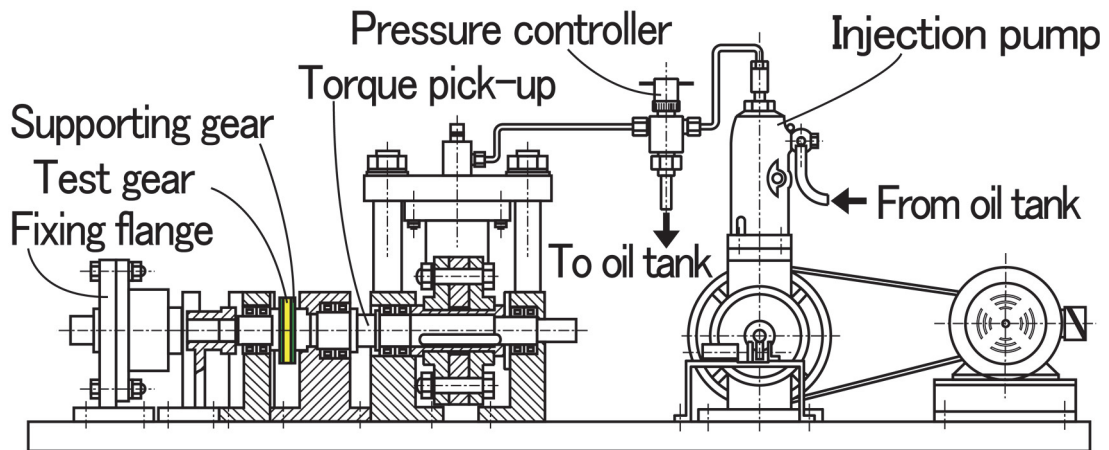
Bending fatigue test machine<sup>(4.25)</sup>
